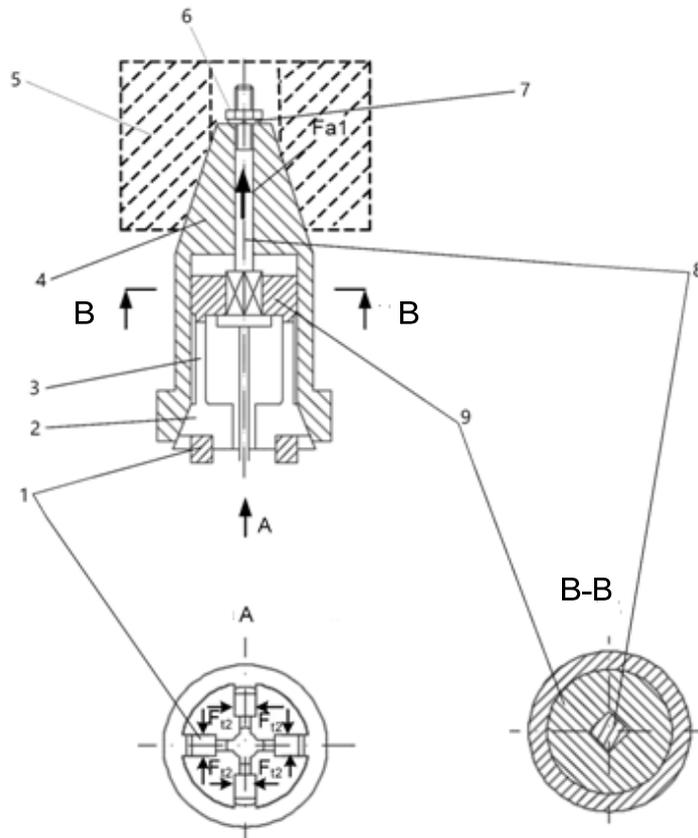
Face mill with tangential clamp: 1 – cutting insert; 2 – sponge; 3 – petal; 4 – body with a tapered shank; 5 – spindle; 6 – nut; 7 – lock washer; 8 – special screw; 9 – grip clamping four-petal
